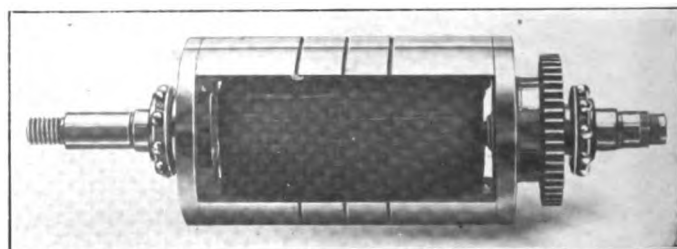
The Splitdorf Armature Carries a Single Winding of Primary Wire and Rotates on Ball Bearings.
